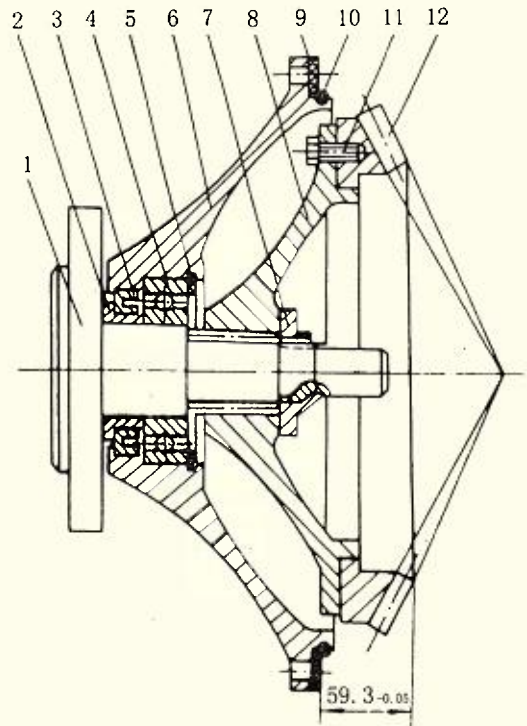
7 Meshing adjustment of the front final drive straight bevel gear pair
